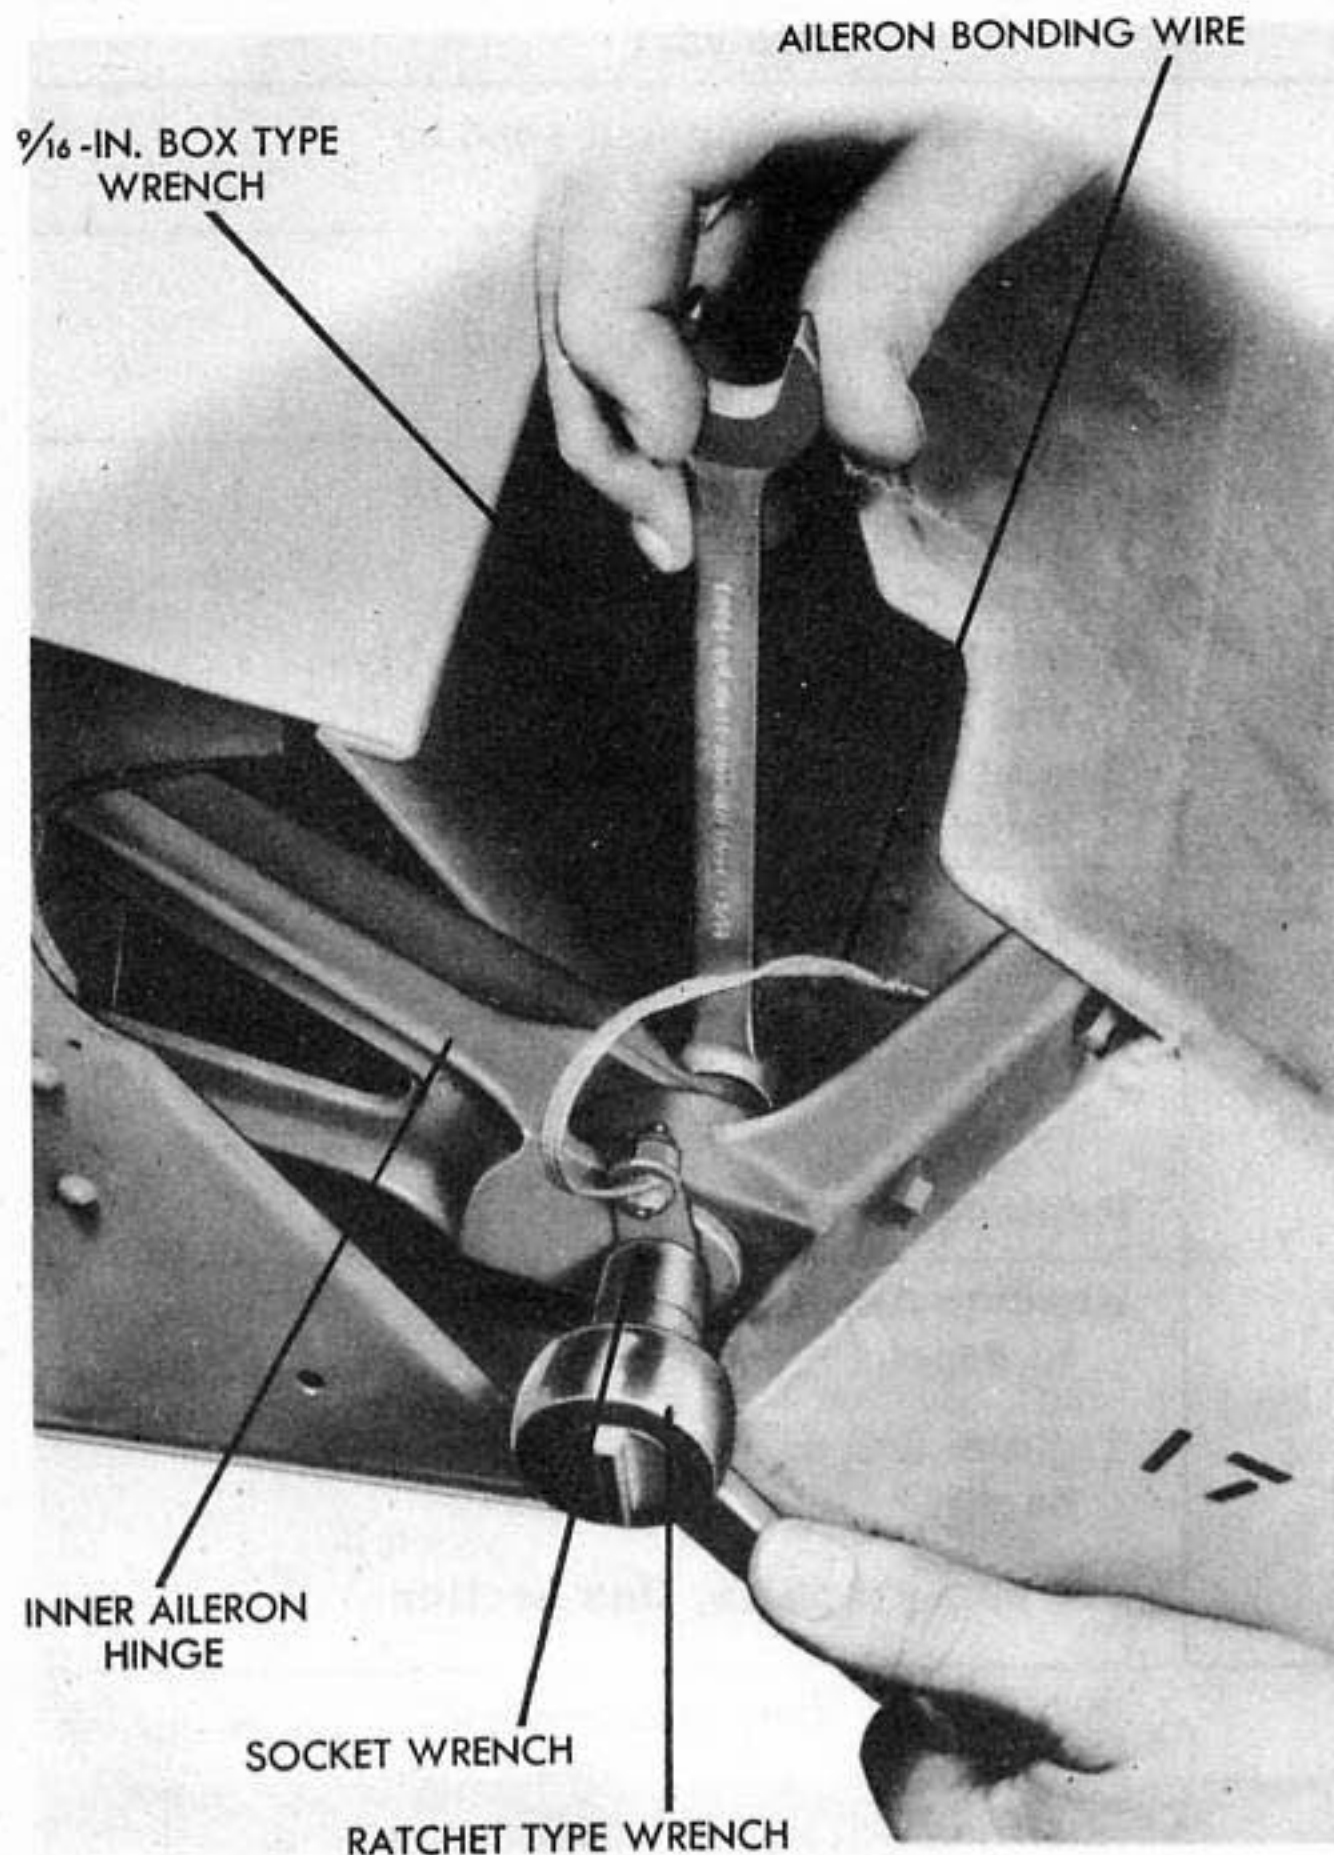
REMOVING AILERON CENTER HINGING BOLT
